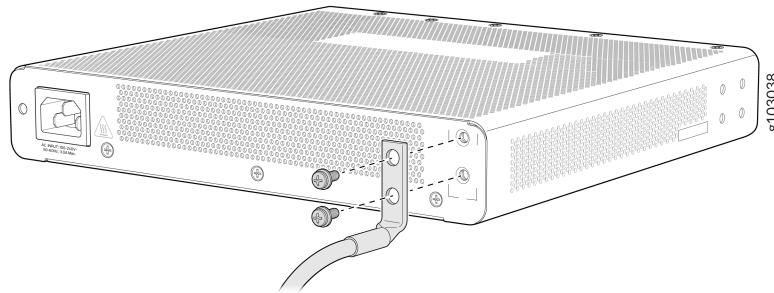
Connect a Grounding Cable to an EX4000-12T Switch
